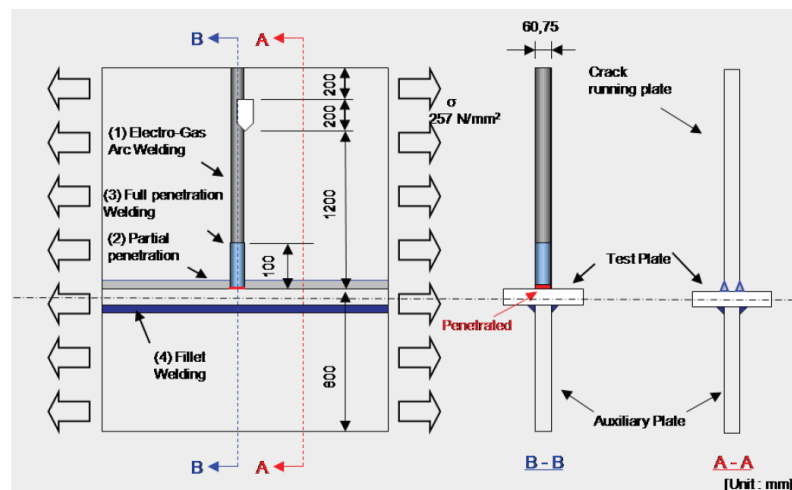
Crack arrest test specimen simulating actual ship structure [74]
